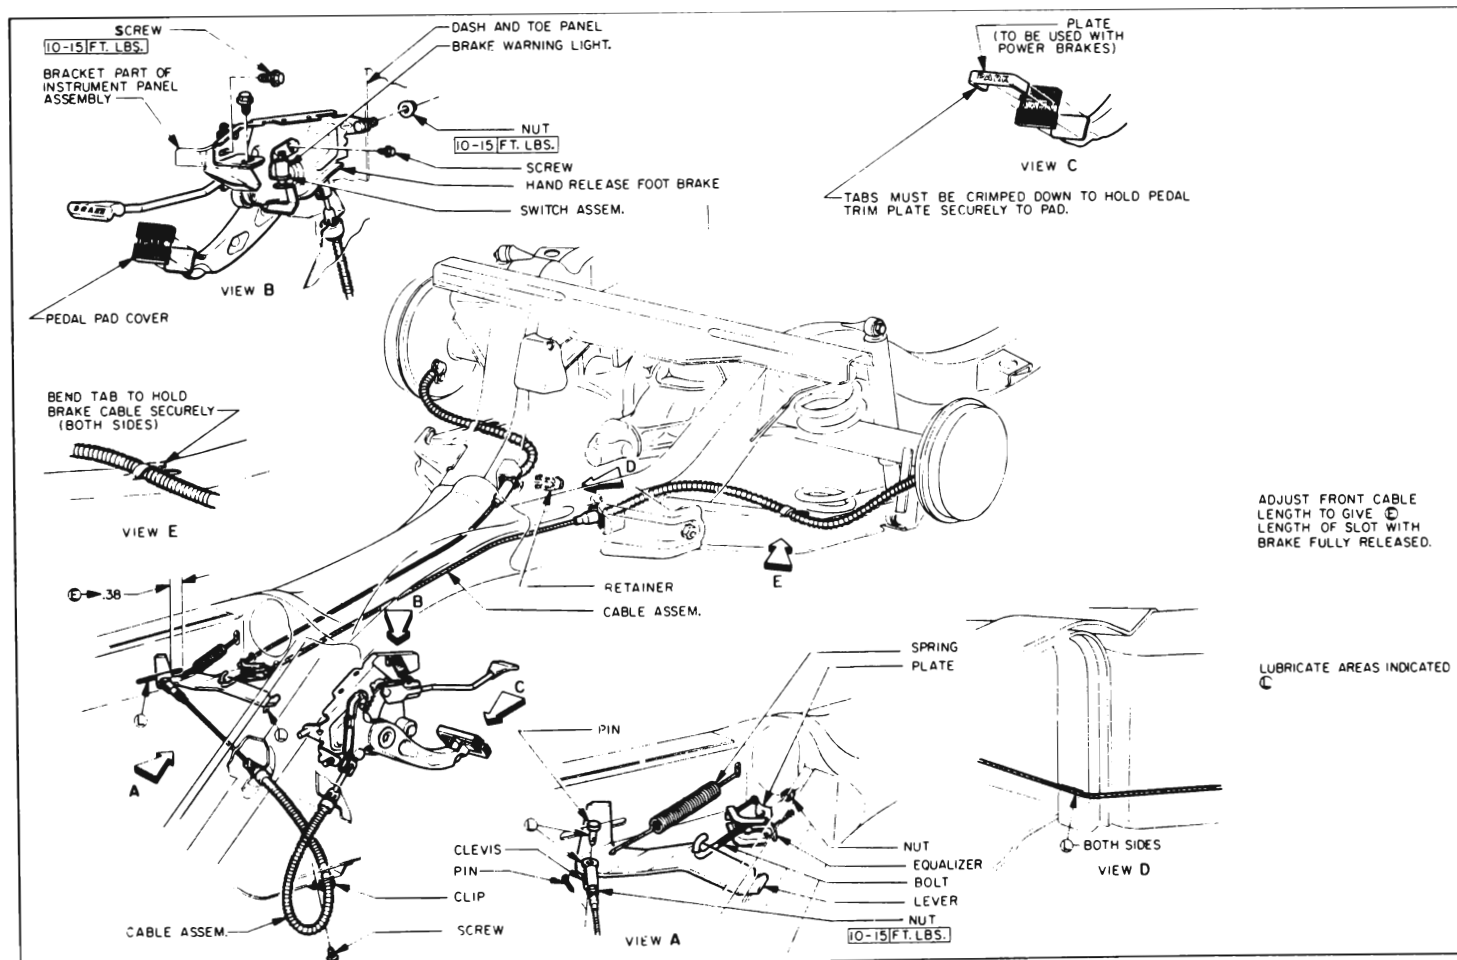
Parking Brake Mechanism - 44-46-4800 Series
